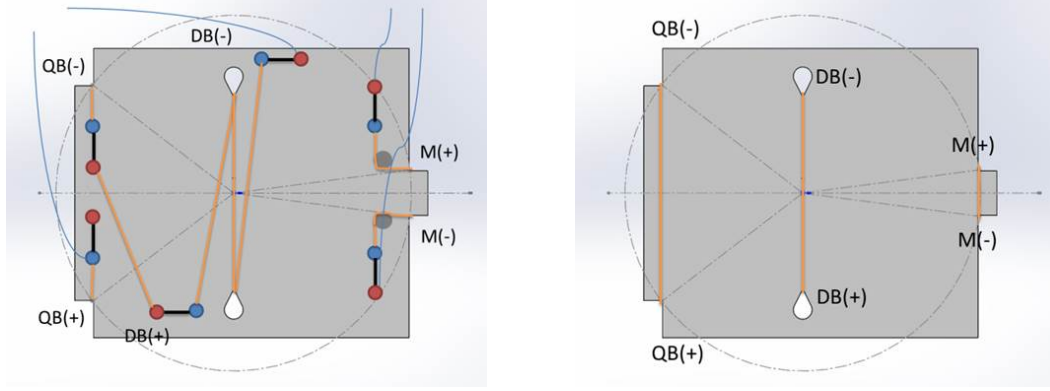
Coil fixture near slip ring. The wire ends on terminal with tension. The connection between terminal and slip ring is done by other wire (Left). Coil fixture away from slip ring (right).
